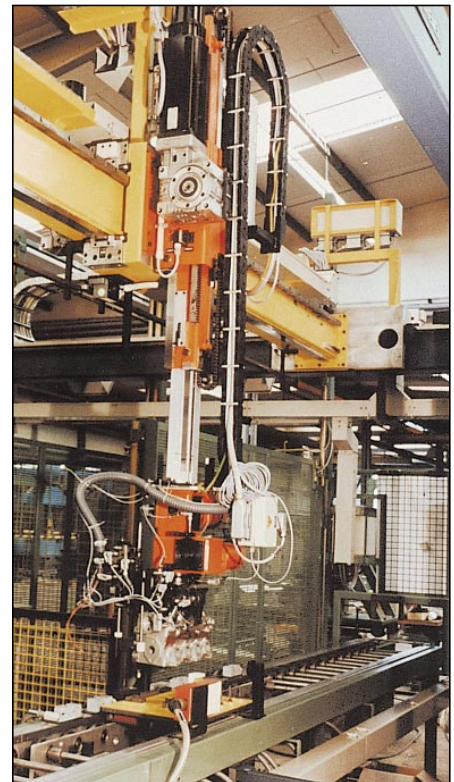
Servo-worm gearheads handle the ups and downs of one or two-axis drives on material handling gantry robots that are commonly used in the automotive industry.
